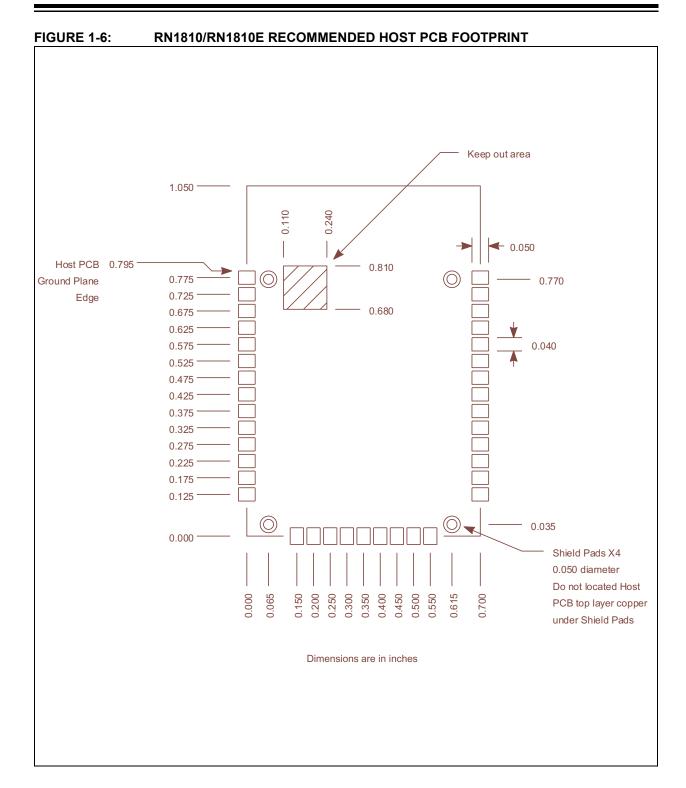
, Figure 1-4 and Figure 1-5 show the physical dimensions and the mounting details of the module. Figure 1-6 and Figure 1-7 show the recommended host PCB footprint and layout.
